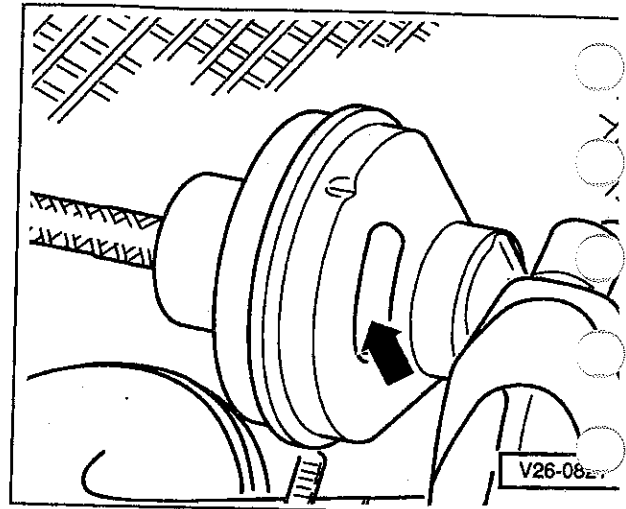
EGR valve mounted to Intake manifold on AAZ Diesel engine. Diaphragm rod is visible through opening in the valve (arrow). Rod should move towards the vacuum line connection.
